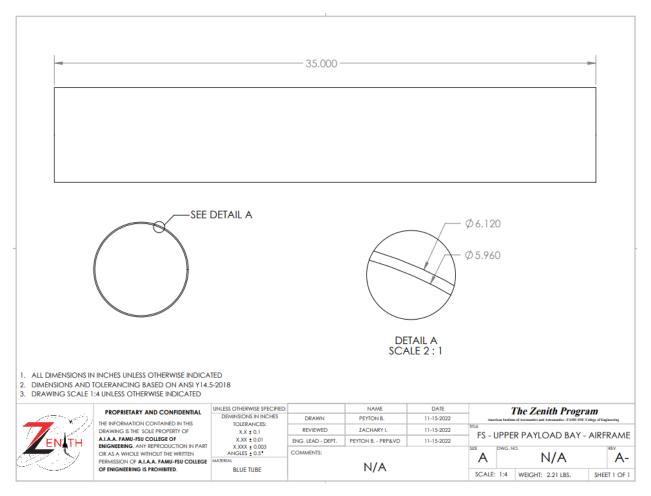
Upper Payload Bay Airframe CAD Drawing
